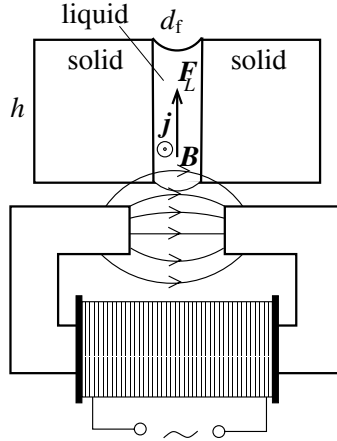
Schematic view of the EM weld-pool support system.
